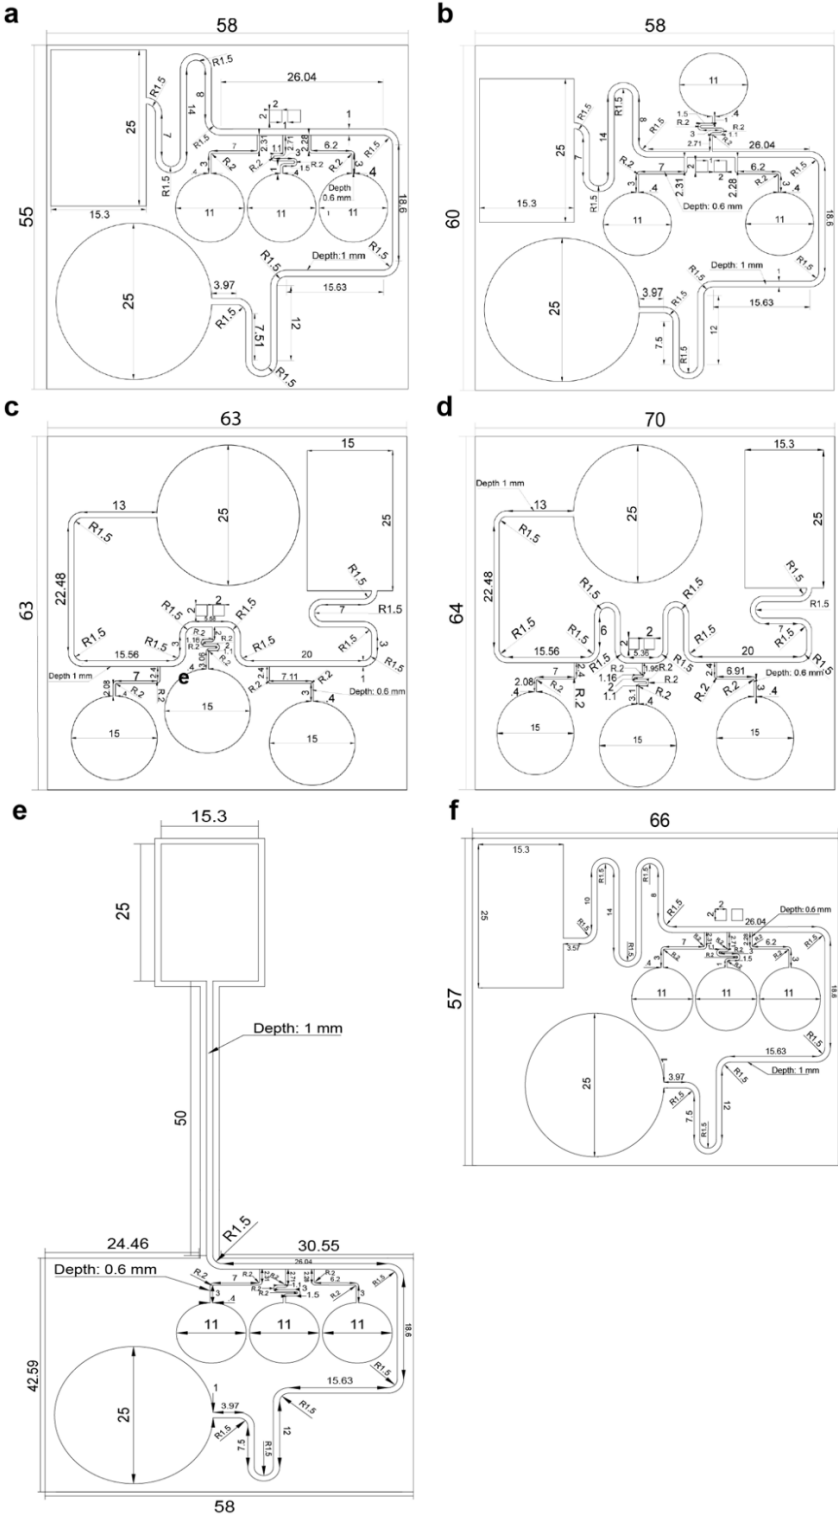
Engineering drawings of devices with channels on the same (a) and opposite sides (b) of the main channel, devices with 15 mm (c) and 30 mm (d) between trigger valves, side-view
